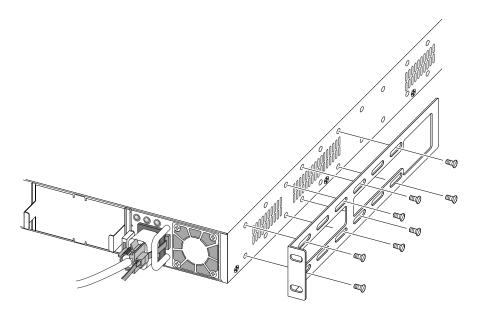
Attaching the Mounting Bracket to the EPS-C2 Chassis
